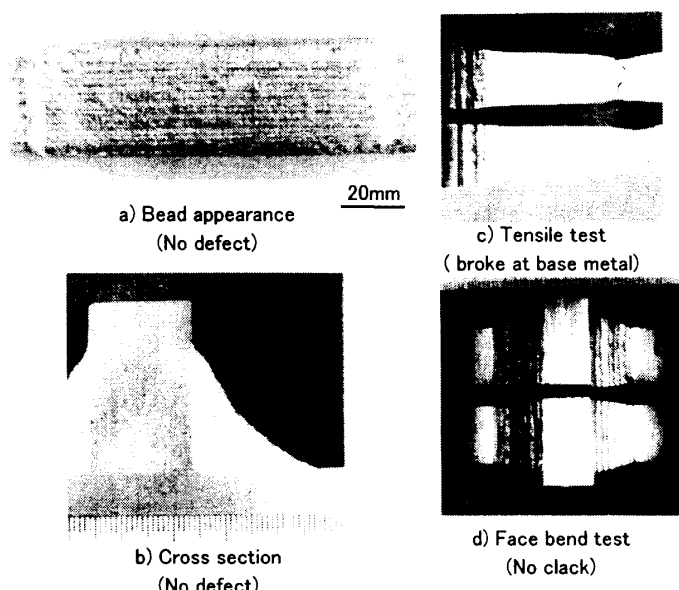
Result of visual inspection and mechanical test for underwater fillet weld zone.
